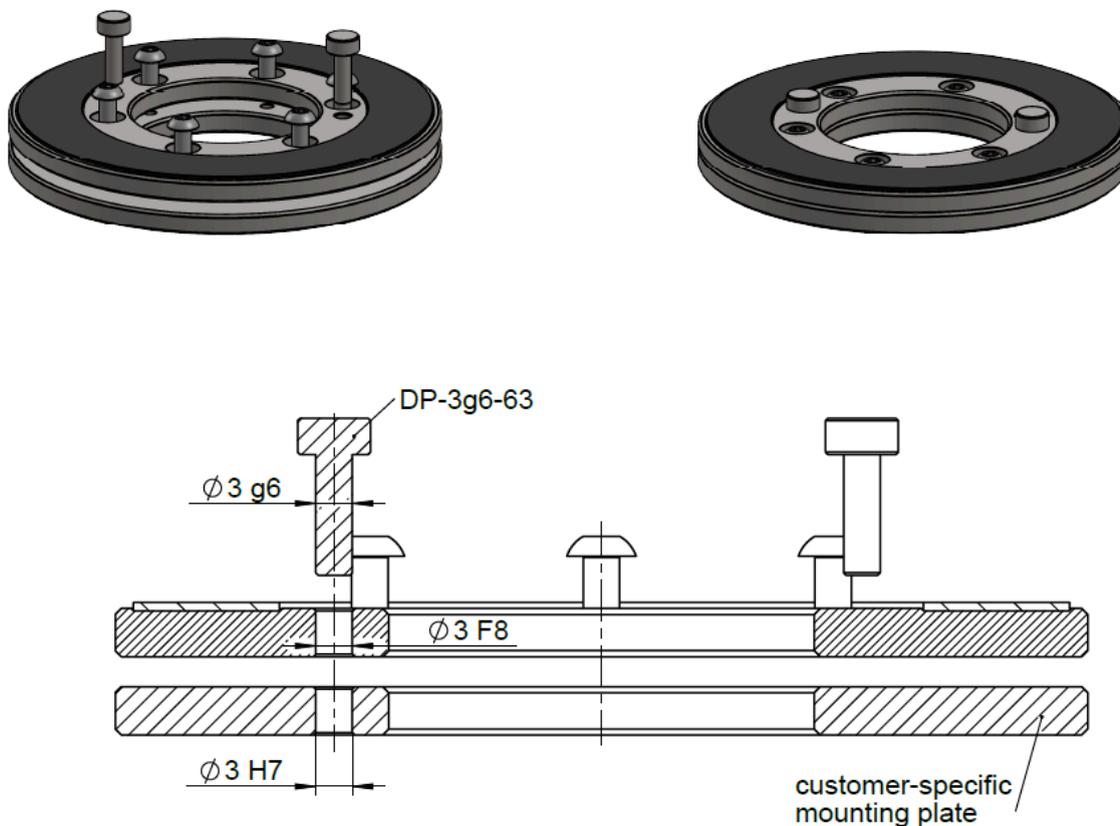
GMI Angle Rotor GAR Dowel-Pin mounting
